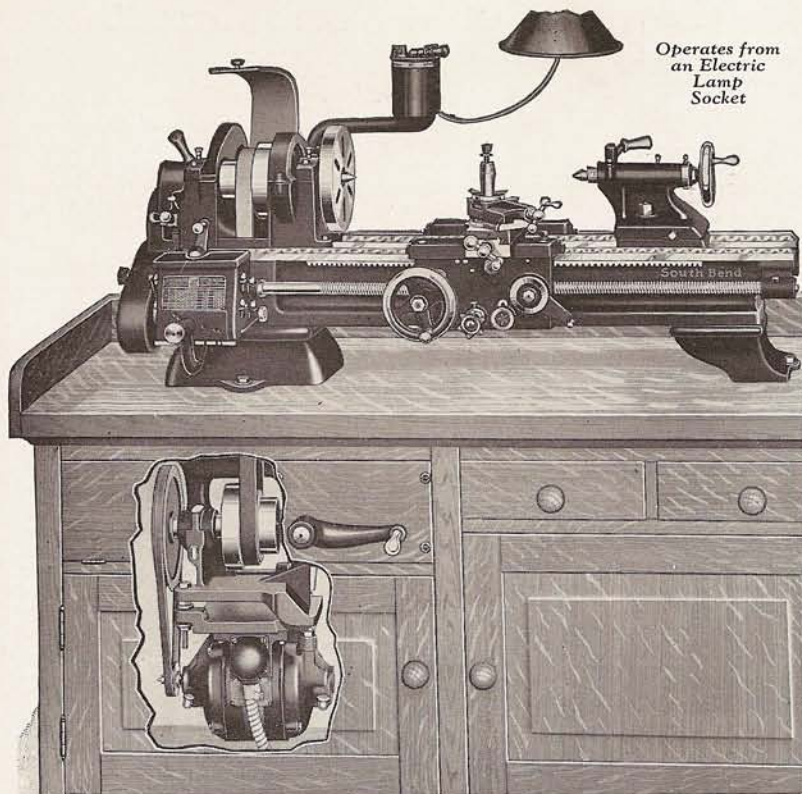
South Bend Underneath Belt Motor Driven Bench Lathe with Section of Bench Front Cut Away to Show Drive Mechanism. Bench used is illustrated and described on page 62.
